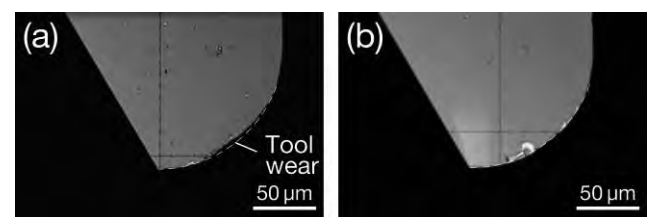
Tool shape machined under (a) conventional and (b) improved conditions, after machining 100000 holes.
